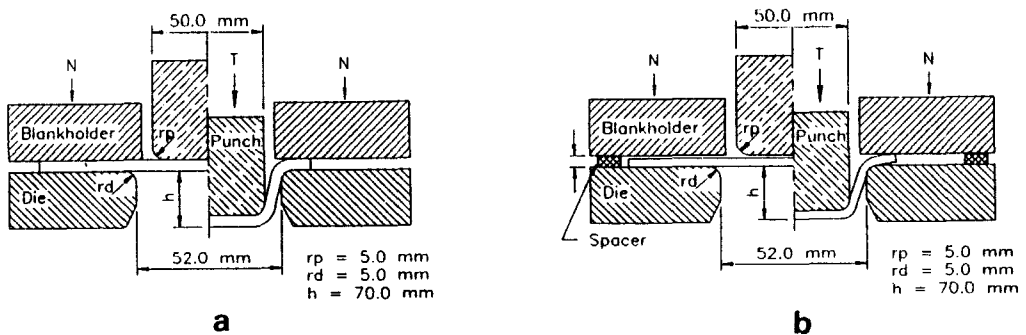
U-bending test (a) under constant blank holding force and (b) under constant die gap
